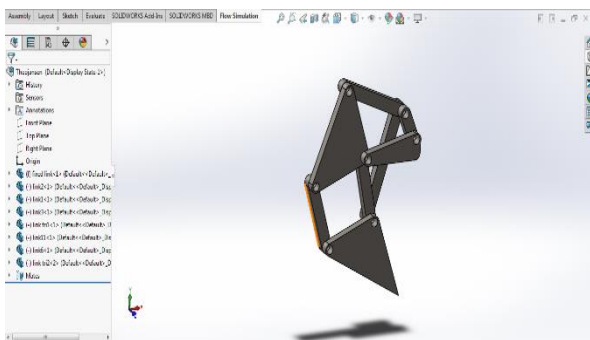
Assembly of Theo Jansen Mechanism in Solid Works
